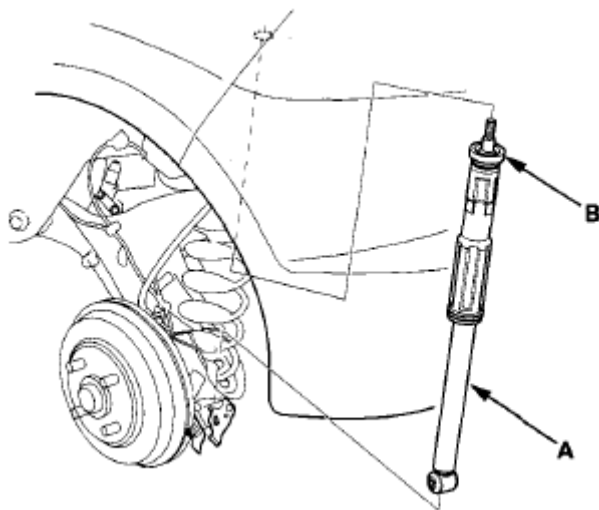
Identifying Damper Assembly And Damper Rubber Mount
